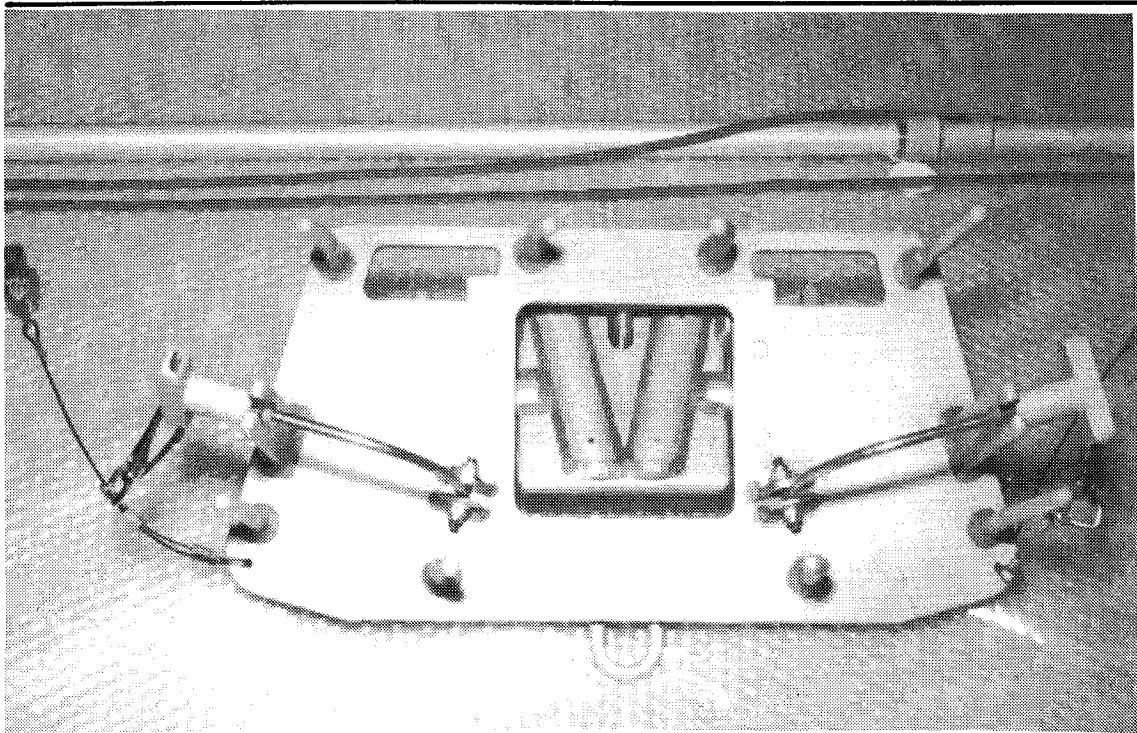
Bottom Side of Base Plate Assembly (Vehicle Attachment)
